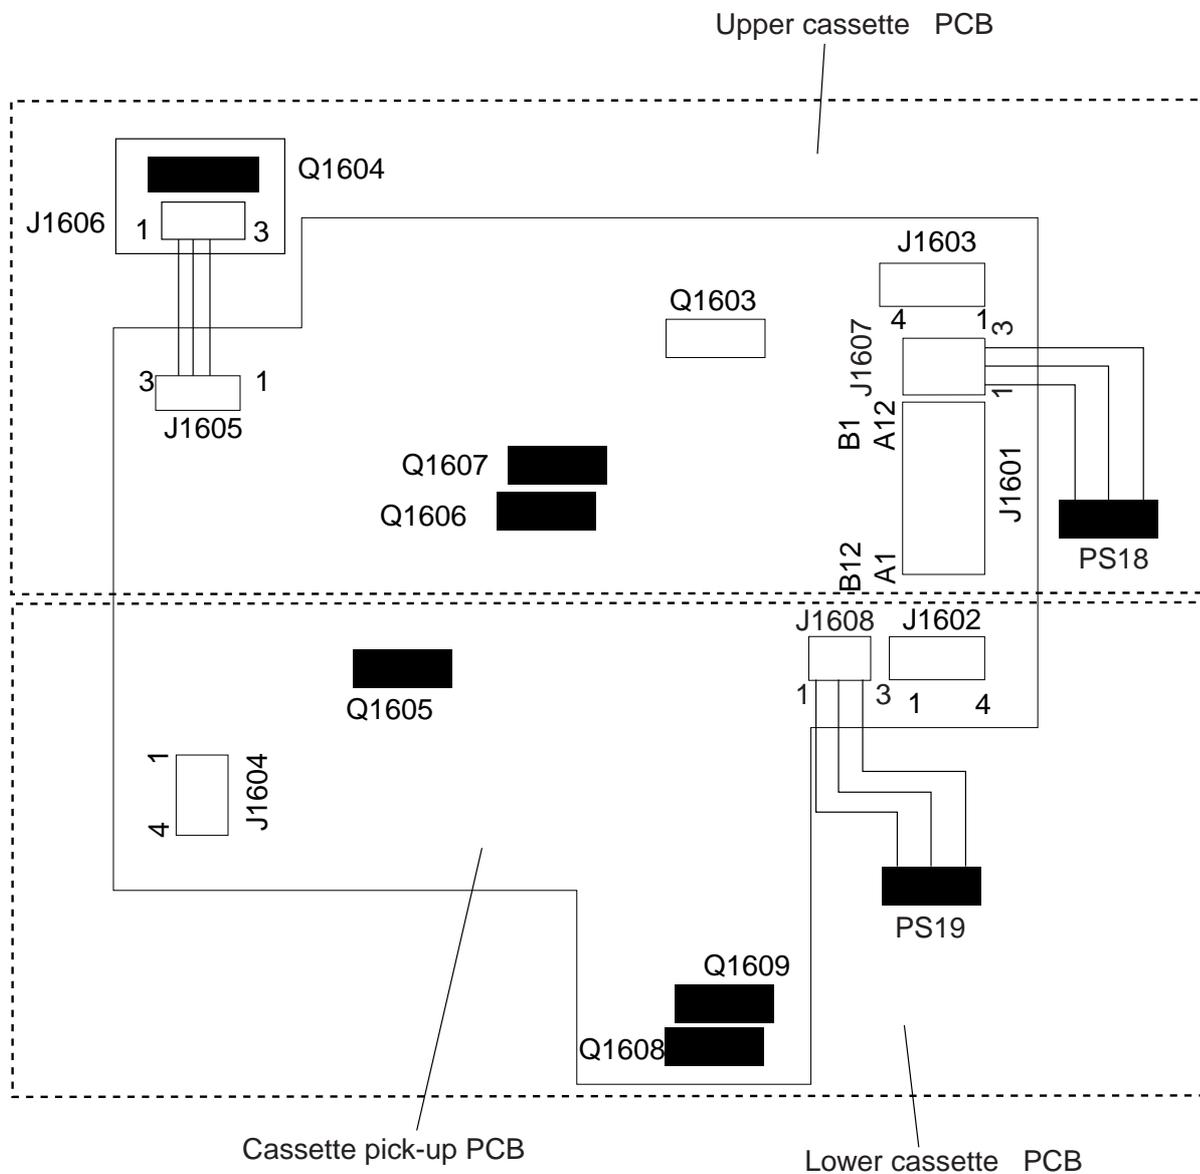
Sensors on the Cassette Pick-Up PCB
